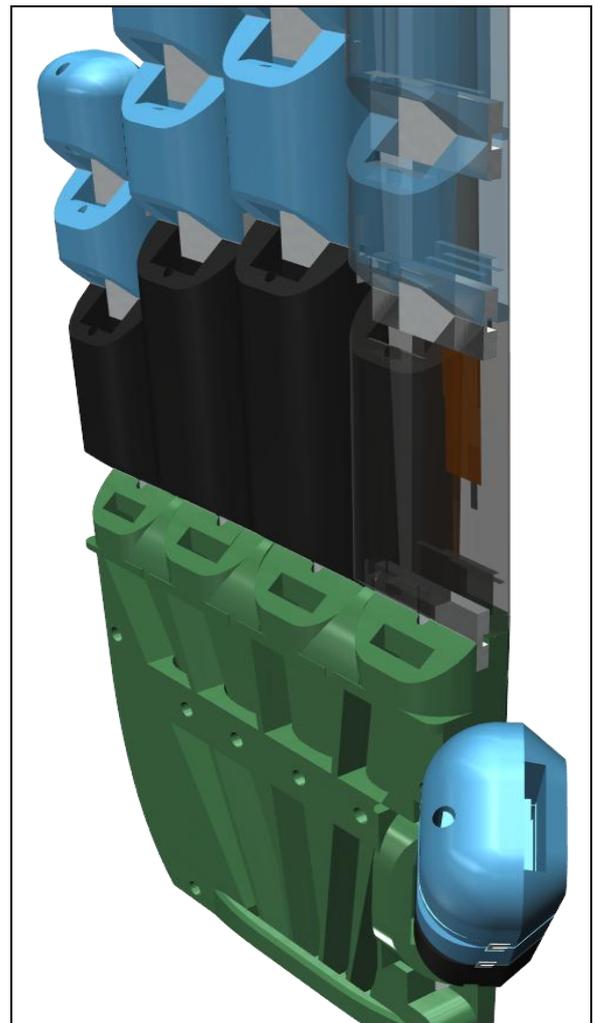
Perspective view of the slave components or hand design to emphasise the sensors placement.
